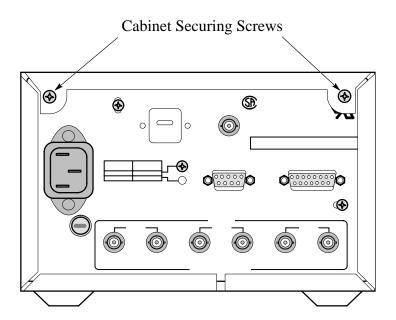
Rear view of the instrument, shown in the cabinet, with the securing screws identified.
